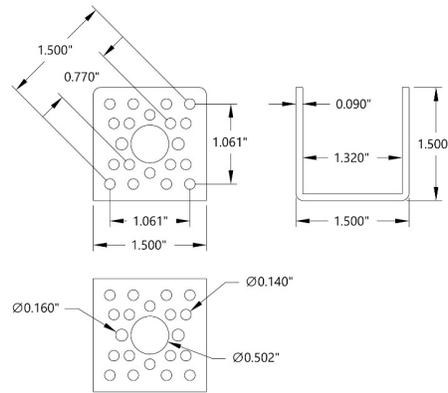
Diagram of Actobotics pattern spacing. The larger center hole is for mounting ball bearings and the smaller holes can be used for brackets and connectors. Image used with permission[4].
